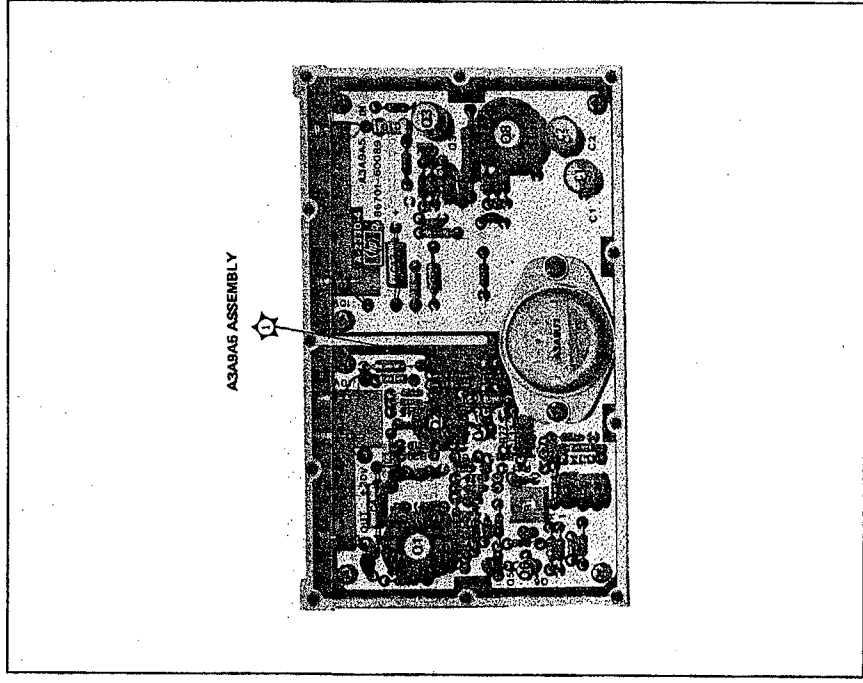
AZABAS Sampler Assembly Components and Test Point Locations
